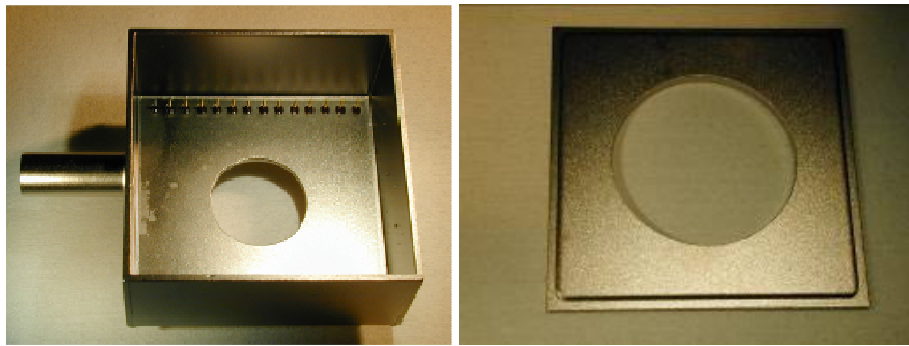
Vacuum package and Kovar lid from Technotron.
